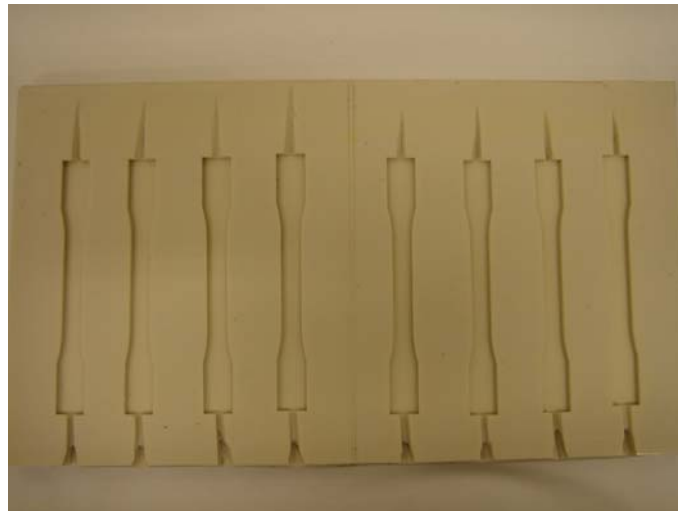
Silicon rubber mold for producing the dumbbell shape specimen.
